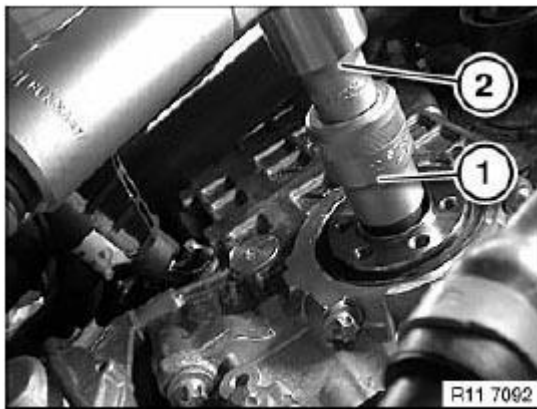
Identifying 3/4" Socket And A 3/4" Extension
